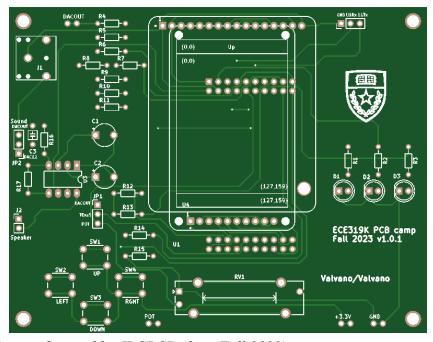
PCB manufactured by JLCPCB (from Fall 2023).
